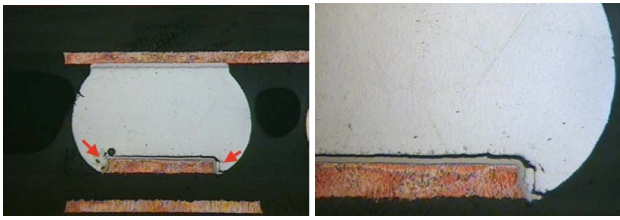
Solder joint fracture near the board-side IMC layer
